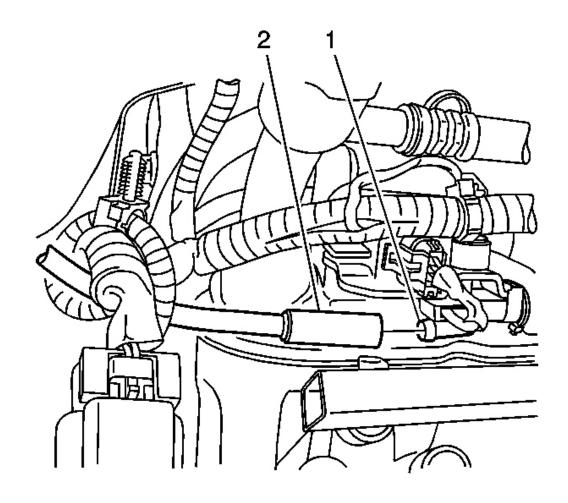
PCV Fresh Air Hose Courtesy of GENERAL MOTORS CORP.
